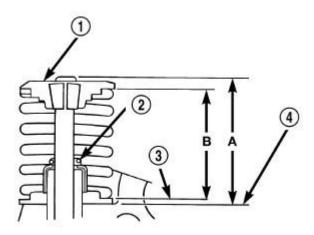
Valve Seal & Spring Courtesy of CHRYSLER LLC
